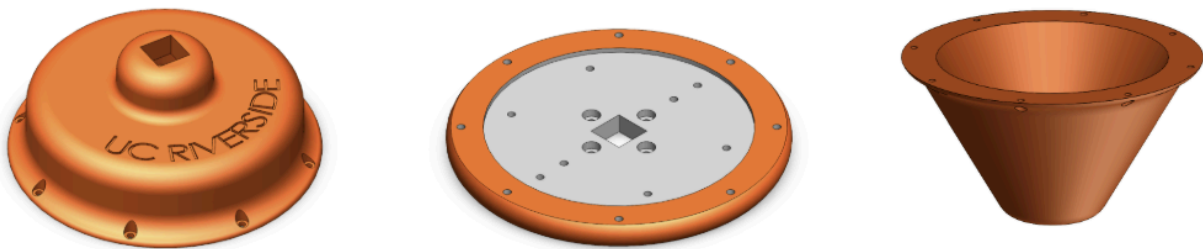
Upper housing (left), Mounting plate (middle), and Lower housing (right)
